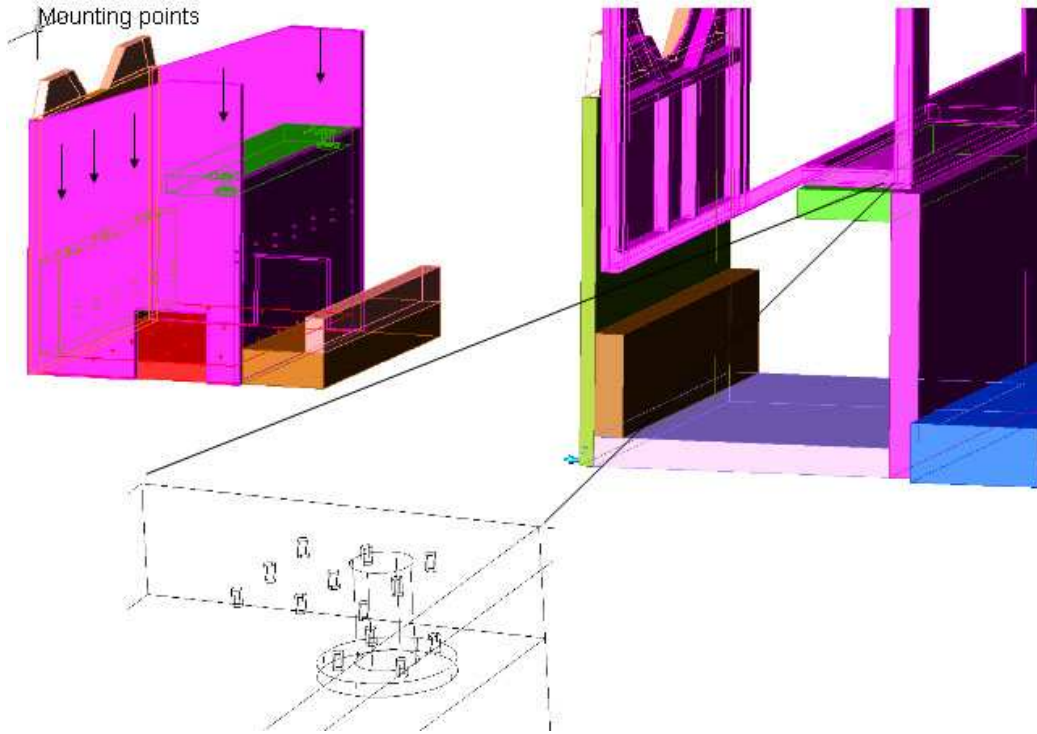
Mounting points in the lower shielding box for the gas enclosure.
